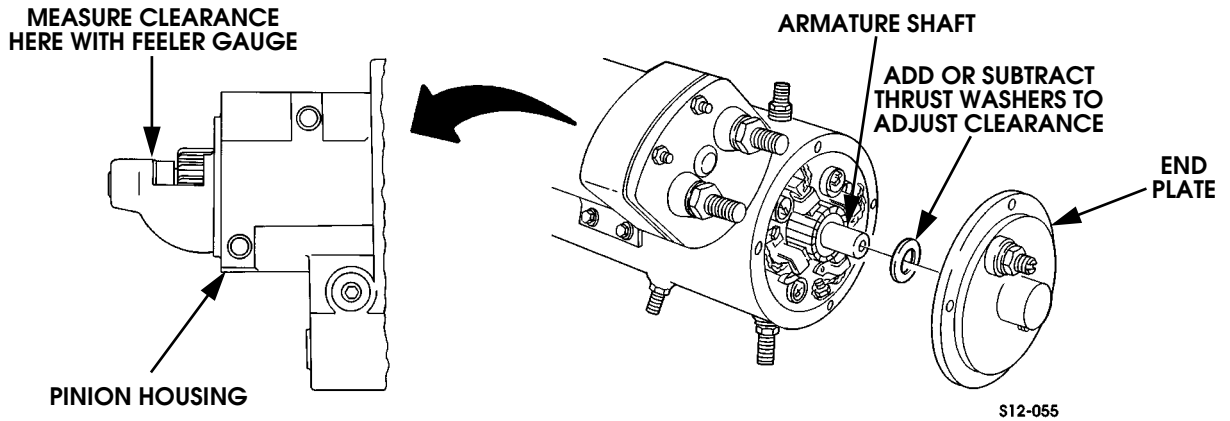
Starter Pinion Clearance Measurement and Adjustment
